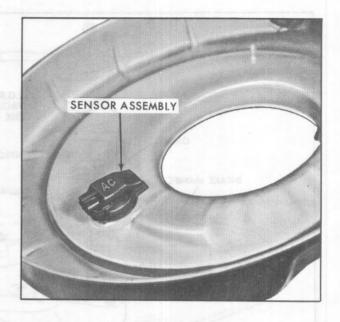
Positioning Thermac Air Cleaner Sensor
